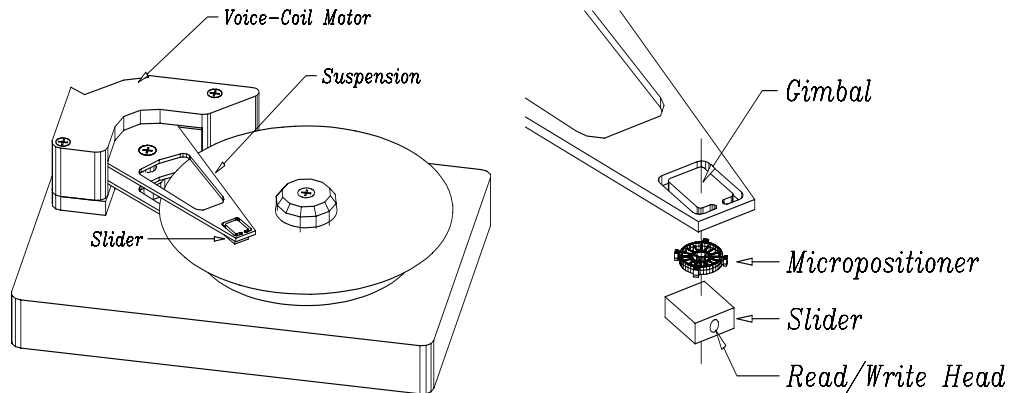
Left - Servo positioning mechanism of a conventional magnetic disk-drive. Right - Exploded view of the microactuator assembly. The microactuator is sandwiched between the slider and a conventional gimbal.
